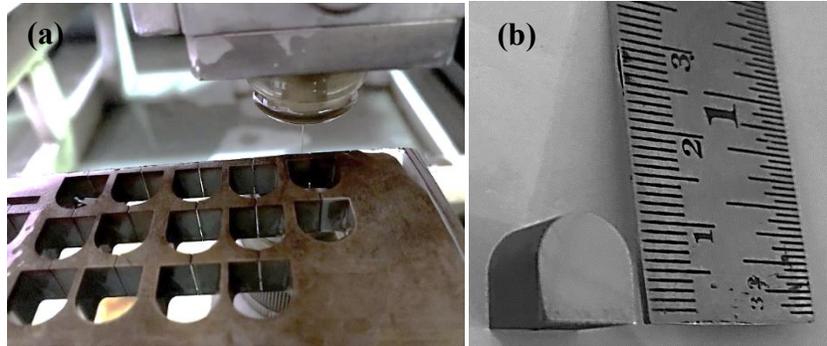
(a) Multiple slots after a few profiles were cut; (b) A single cut specimen with dimensions
